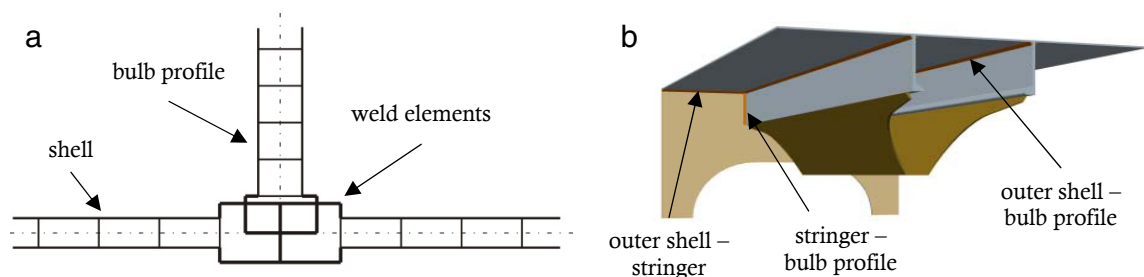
(a) Schematic illustration of the equivalent model consisting of shell elements for fillet welds; (b) selected weld joints of the double hull structure.
